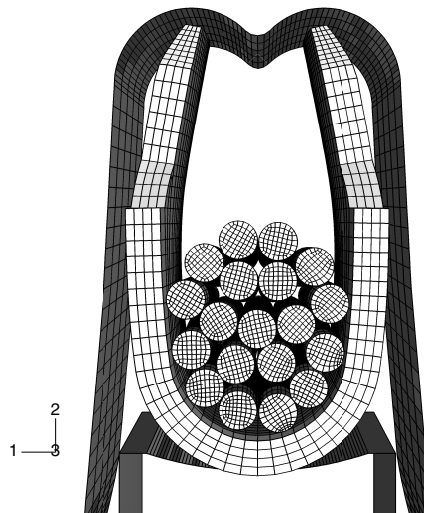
Deformed shape after 39 ms (front view).
